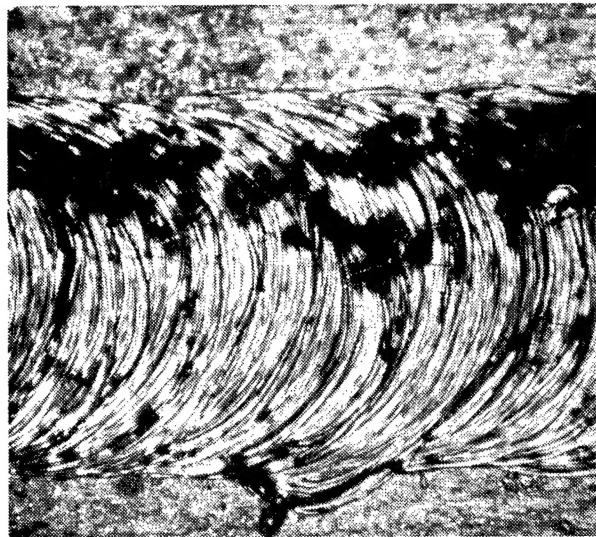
The bottom weld of Figure 1 (52X); note the grain boundaries on the weld bead.
